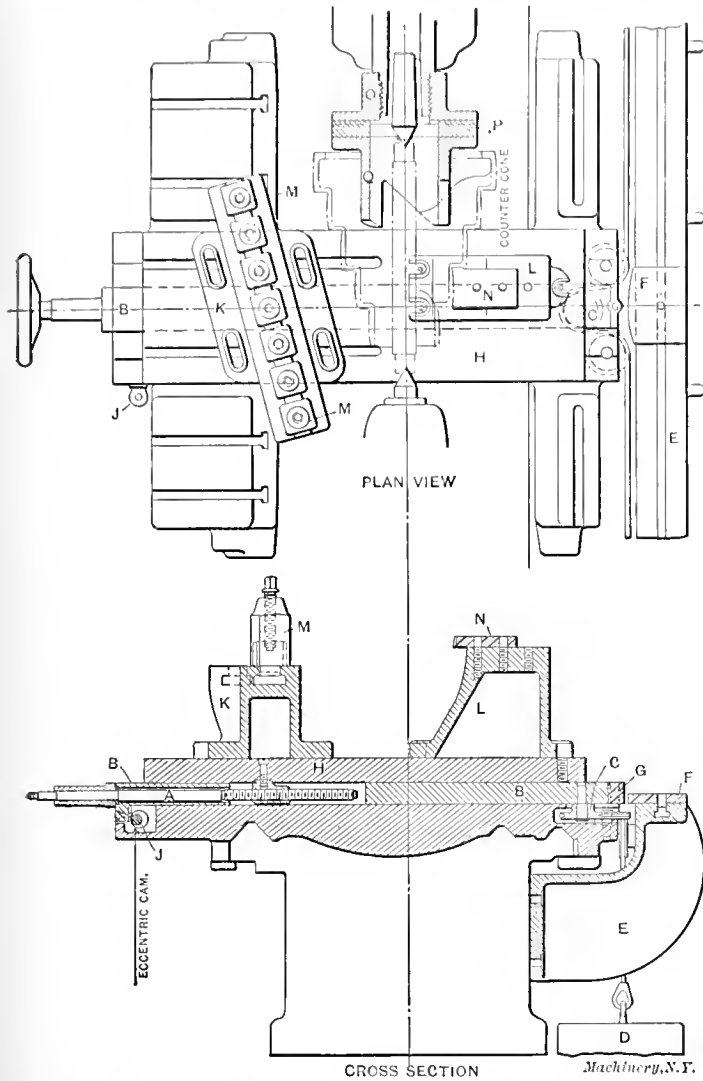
Plan and Section of Carriage of Special Forming Lathe.
